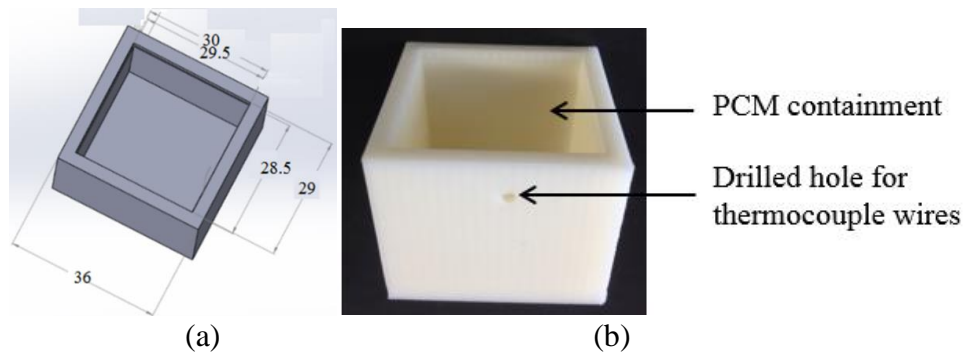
The 3-D printed PCM containment (a) design and (b) fabricated part, for the micro-finned thermal system. Dimensions in mm.
